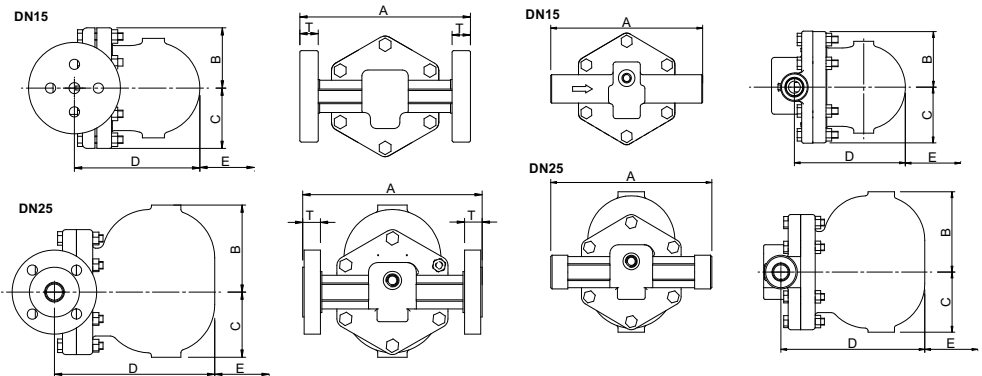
Dimensional Drawing of FMAE53 Flanged
